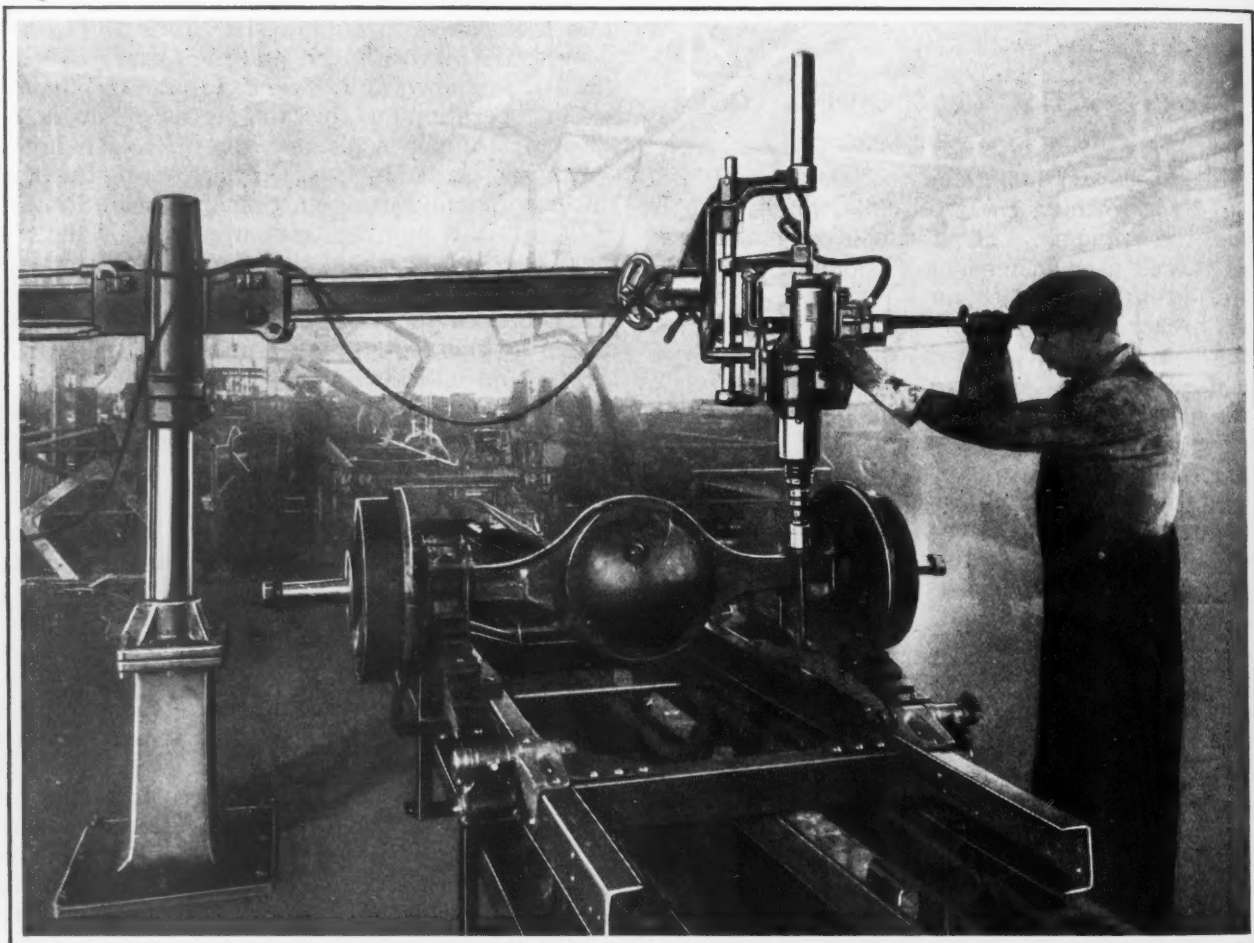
Electric Nut-setter Mounted on a Stand for Tightening Nuts up to 1 1/4 Inches across Flats, in Rear Axle Truck Assembly
